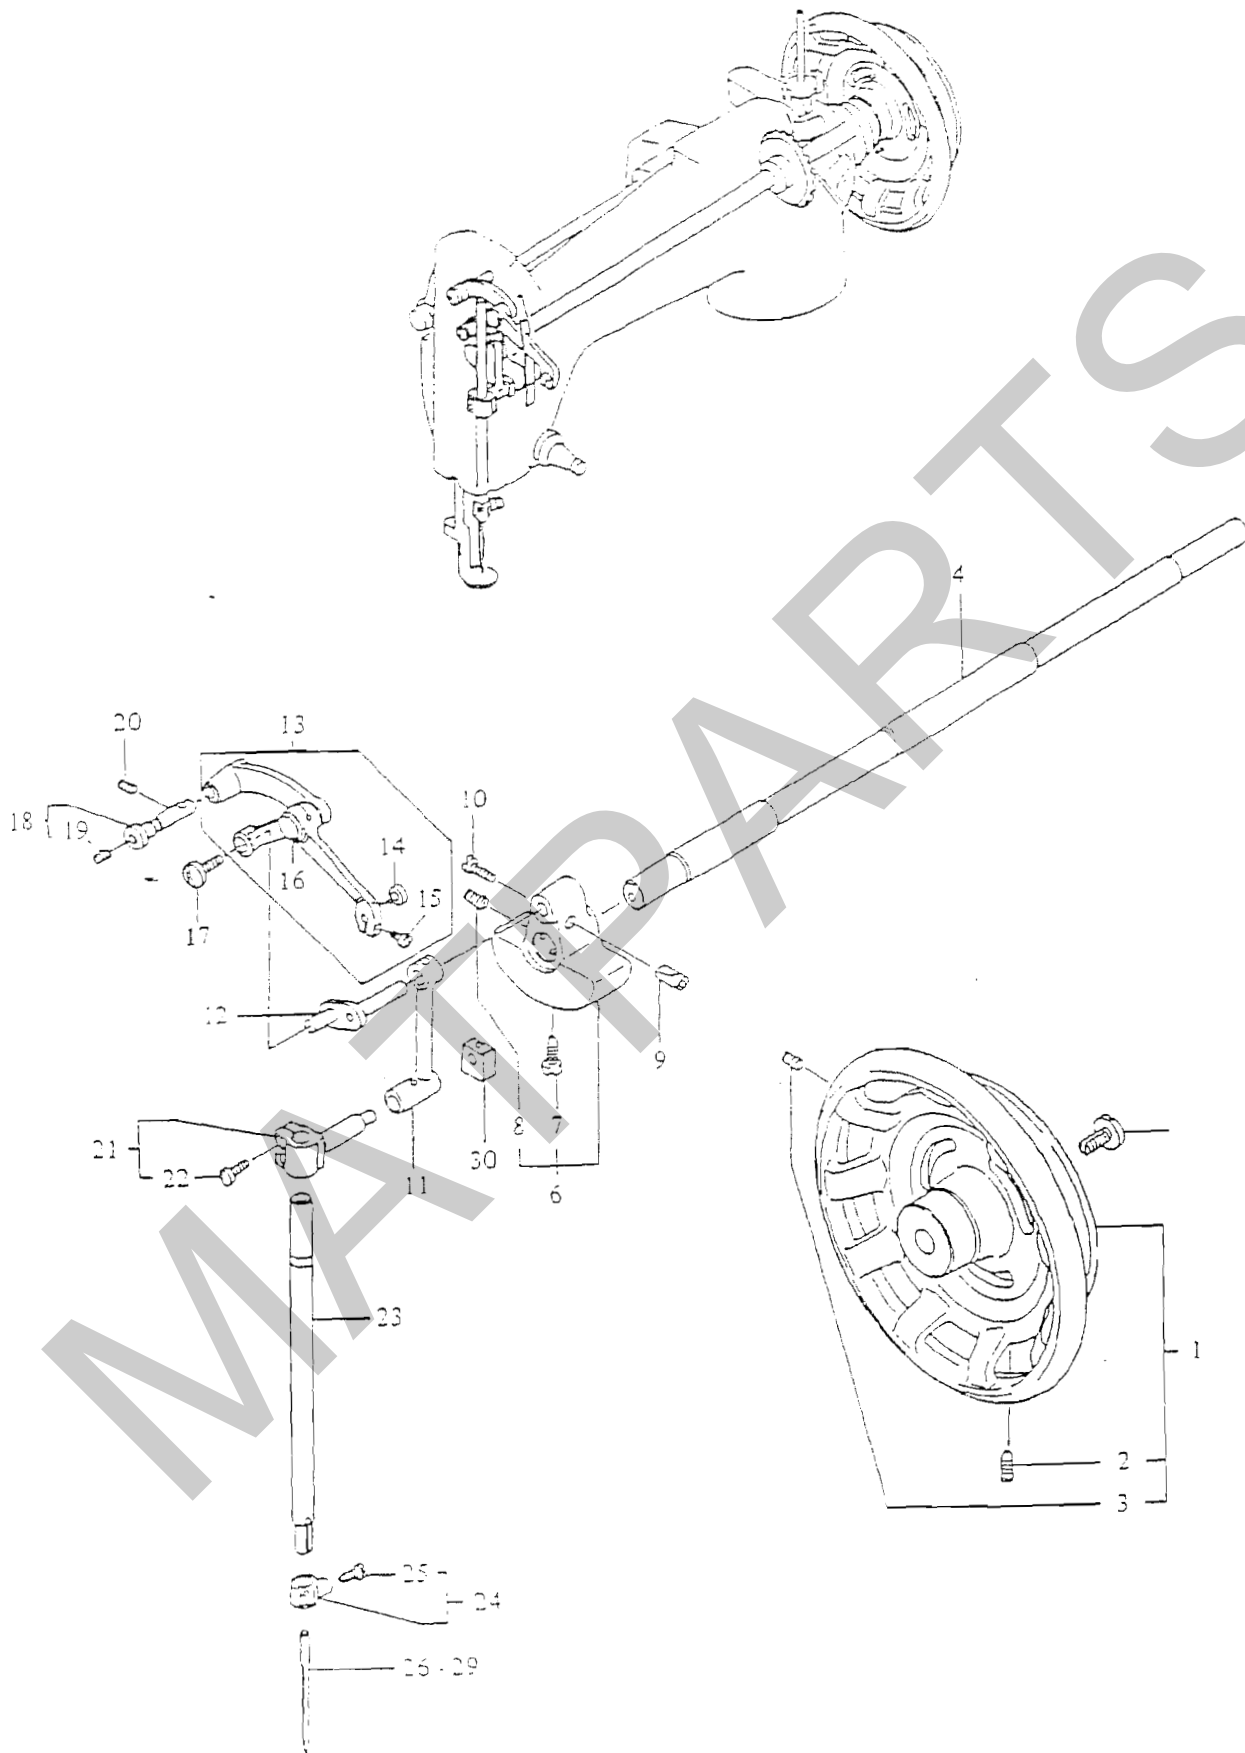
ARM SHAFT & NEEDLE BAR PARTS
